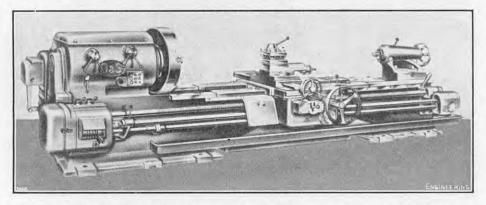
O. & S. Heavy-Duty Centre Lathe; Drummond-Asquith (Sales), Ltd.
